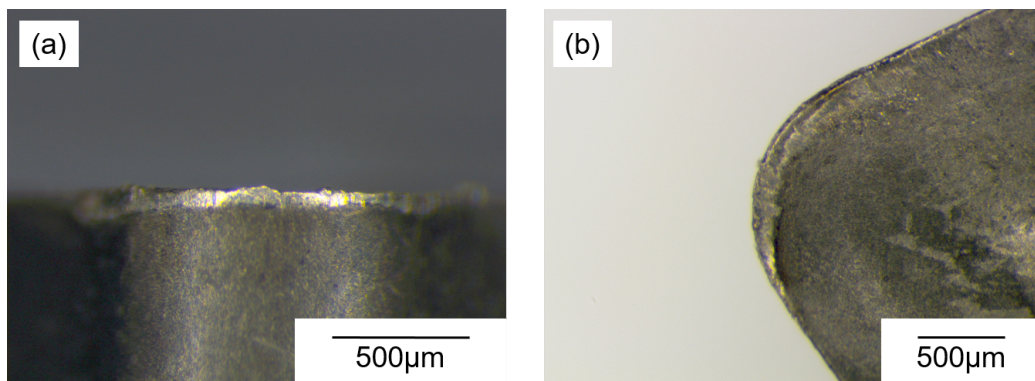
Microscope images showing the degree of tool wear after trial 3.2.4 on billet 3.2. Showing (a) the flank face and (b) the rake face.
